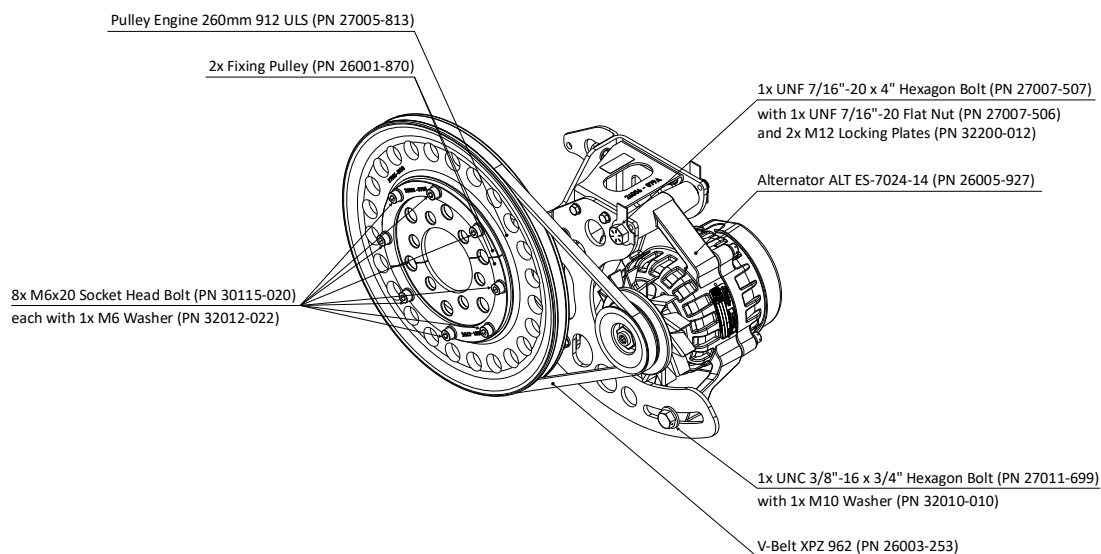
Isometric View Ext. Alternator Kit 70A Rotax 912ULS
